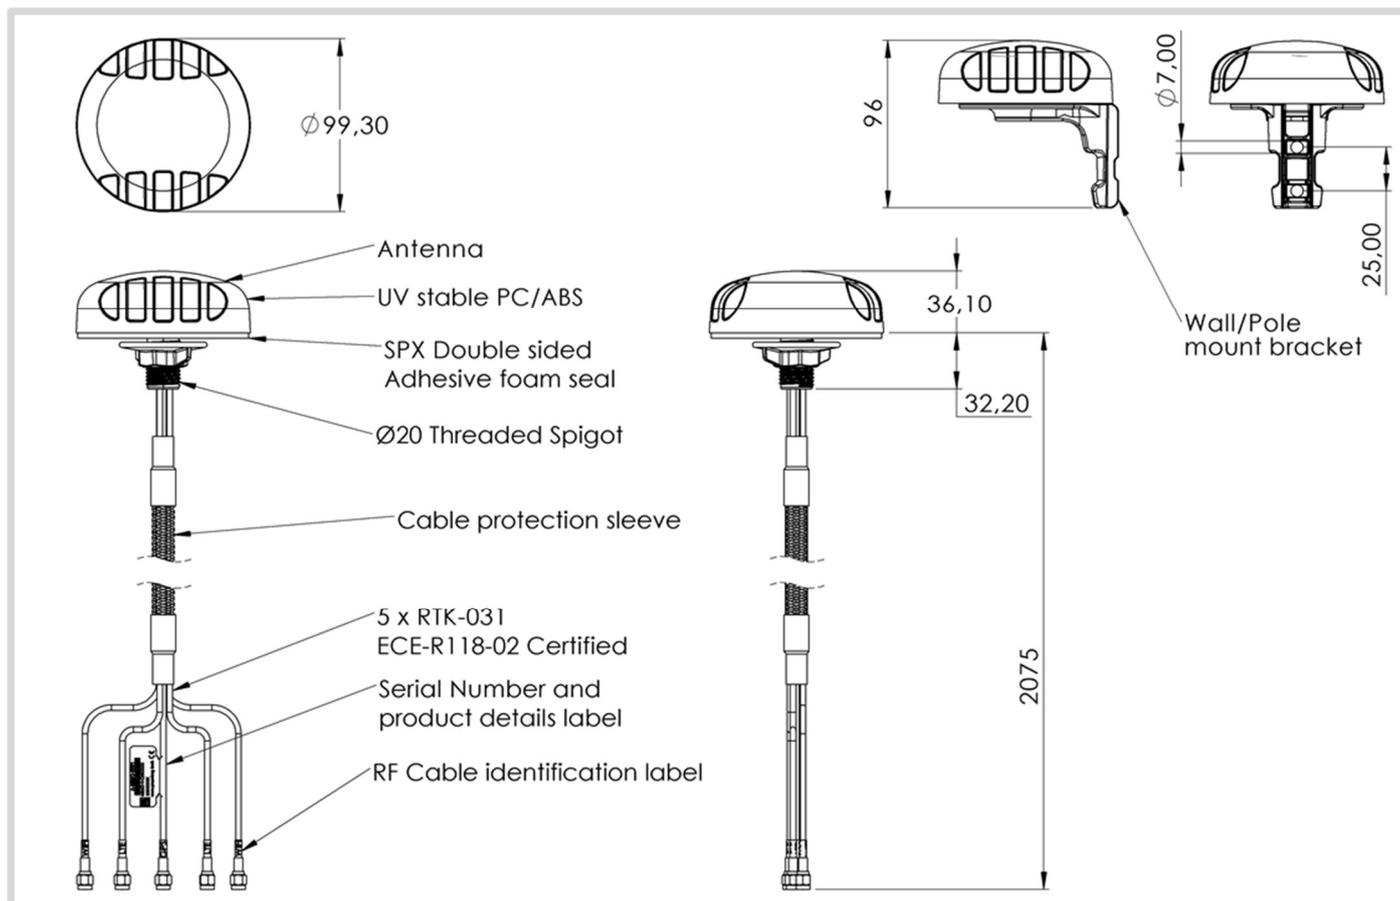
Technical Drawing of the PUCK (PUCK-0005 used in this diagram)
